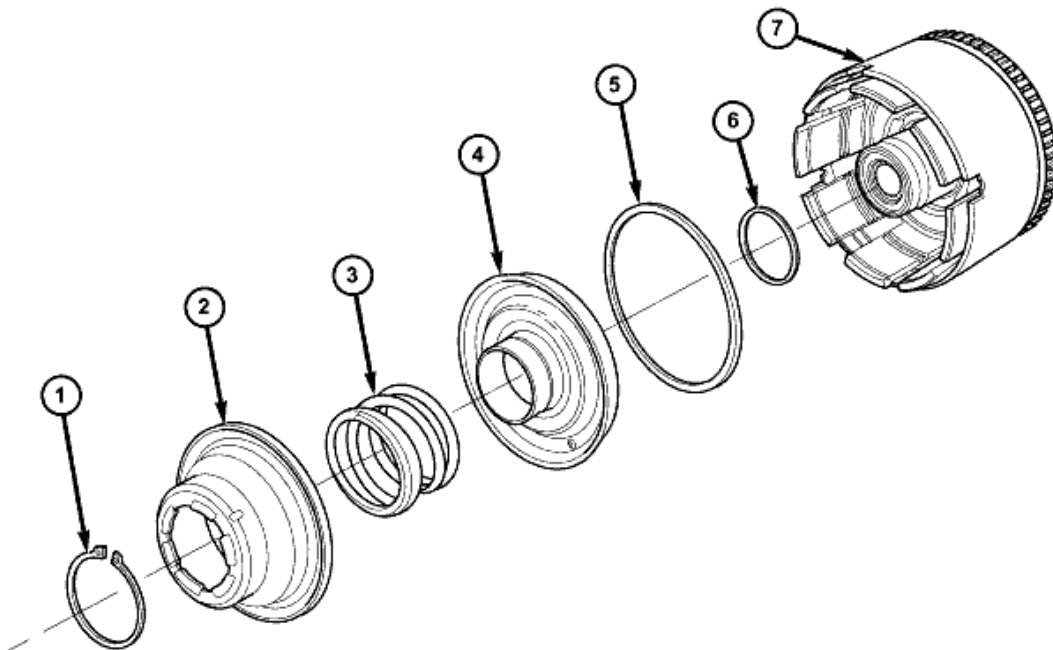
Underdrive Clutch Piston, Spring & Retainer
